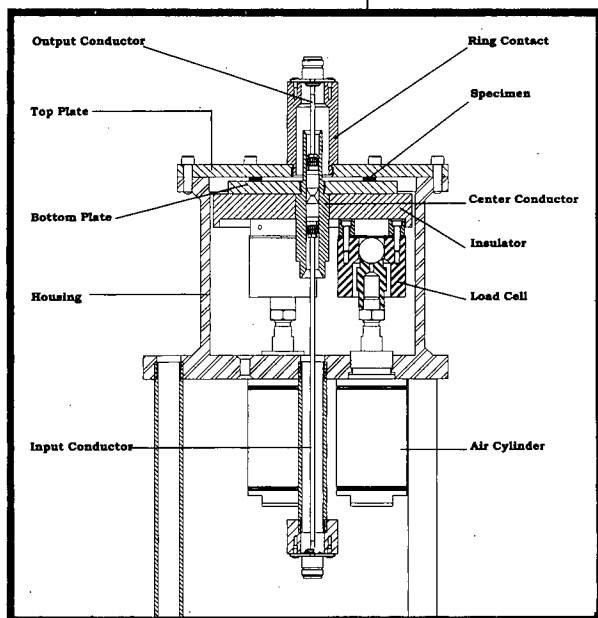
Schematic of Coaxial Test Fixture for Transfer Impedance Test.
